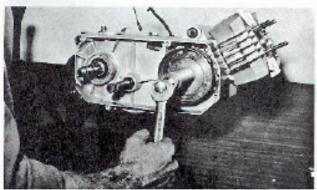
With the flywheel still held by the #4 wrench, remove the clutch assembly with the extractor tool #13.
